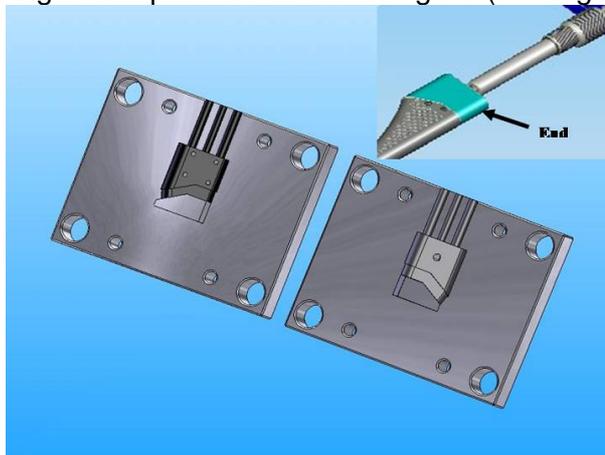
CAD image showing the tooling for the manufacture of the injection moulded rasp unit end drive cap design (see inset).
